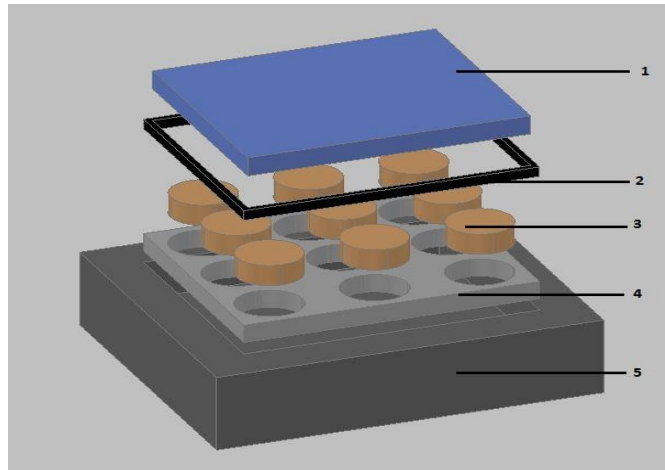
Chart. Three dimensional view of the Assembly Design IV (disassembled).
